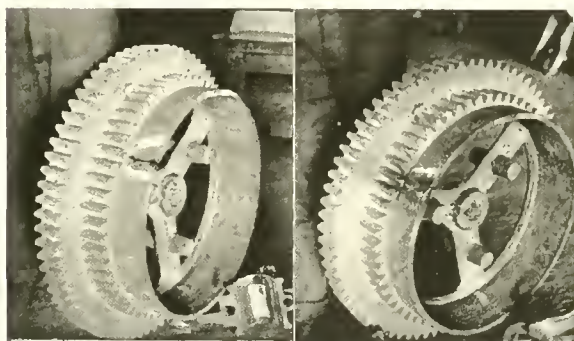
Large Steel Gear showing shrinkage crack which would have made it necessary to scrap the casting had it not been for arc welding.
